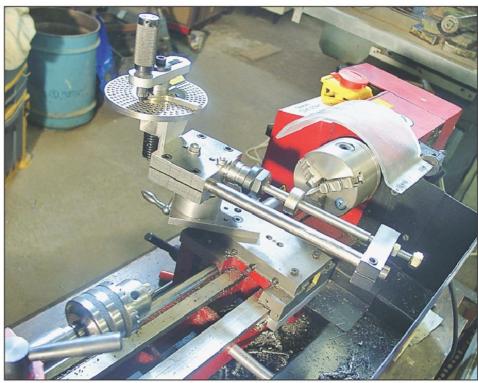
Dividing head set up on the Mini-Lathe to drill into a conical surface.
